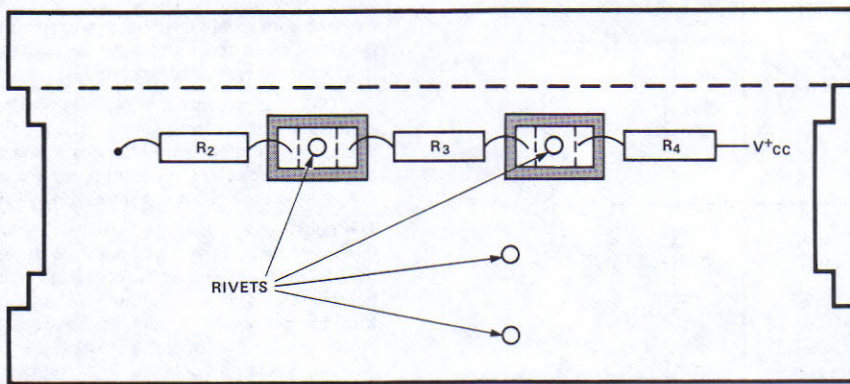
Circuit Board Layout and Component Placement (Bottom View).
